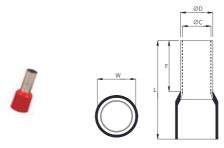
Appearance and dimensions of the tube pre-insulating lug (TG-JT type)
